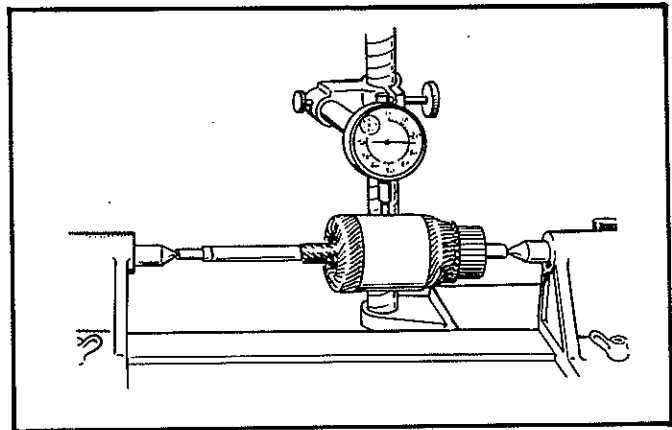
CHECKING ARMATURE SHAFT RUNOUT
